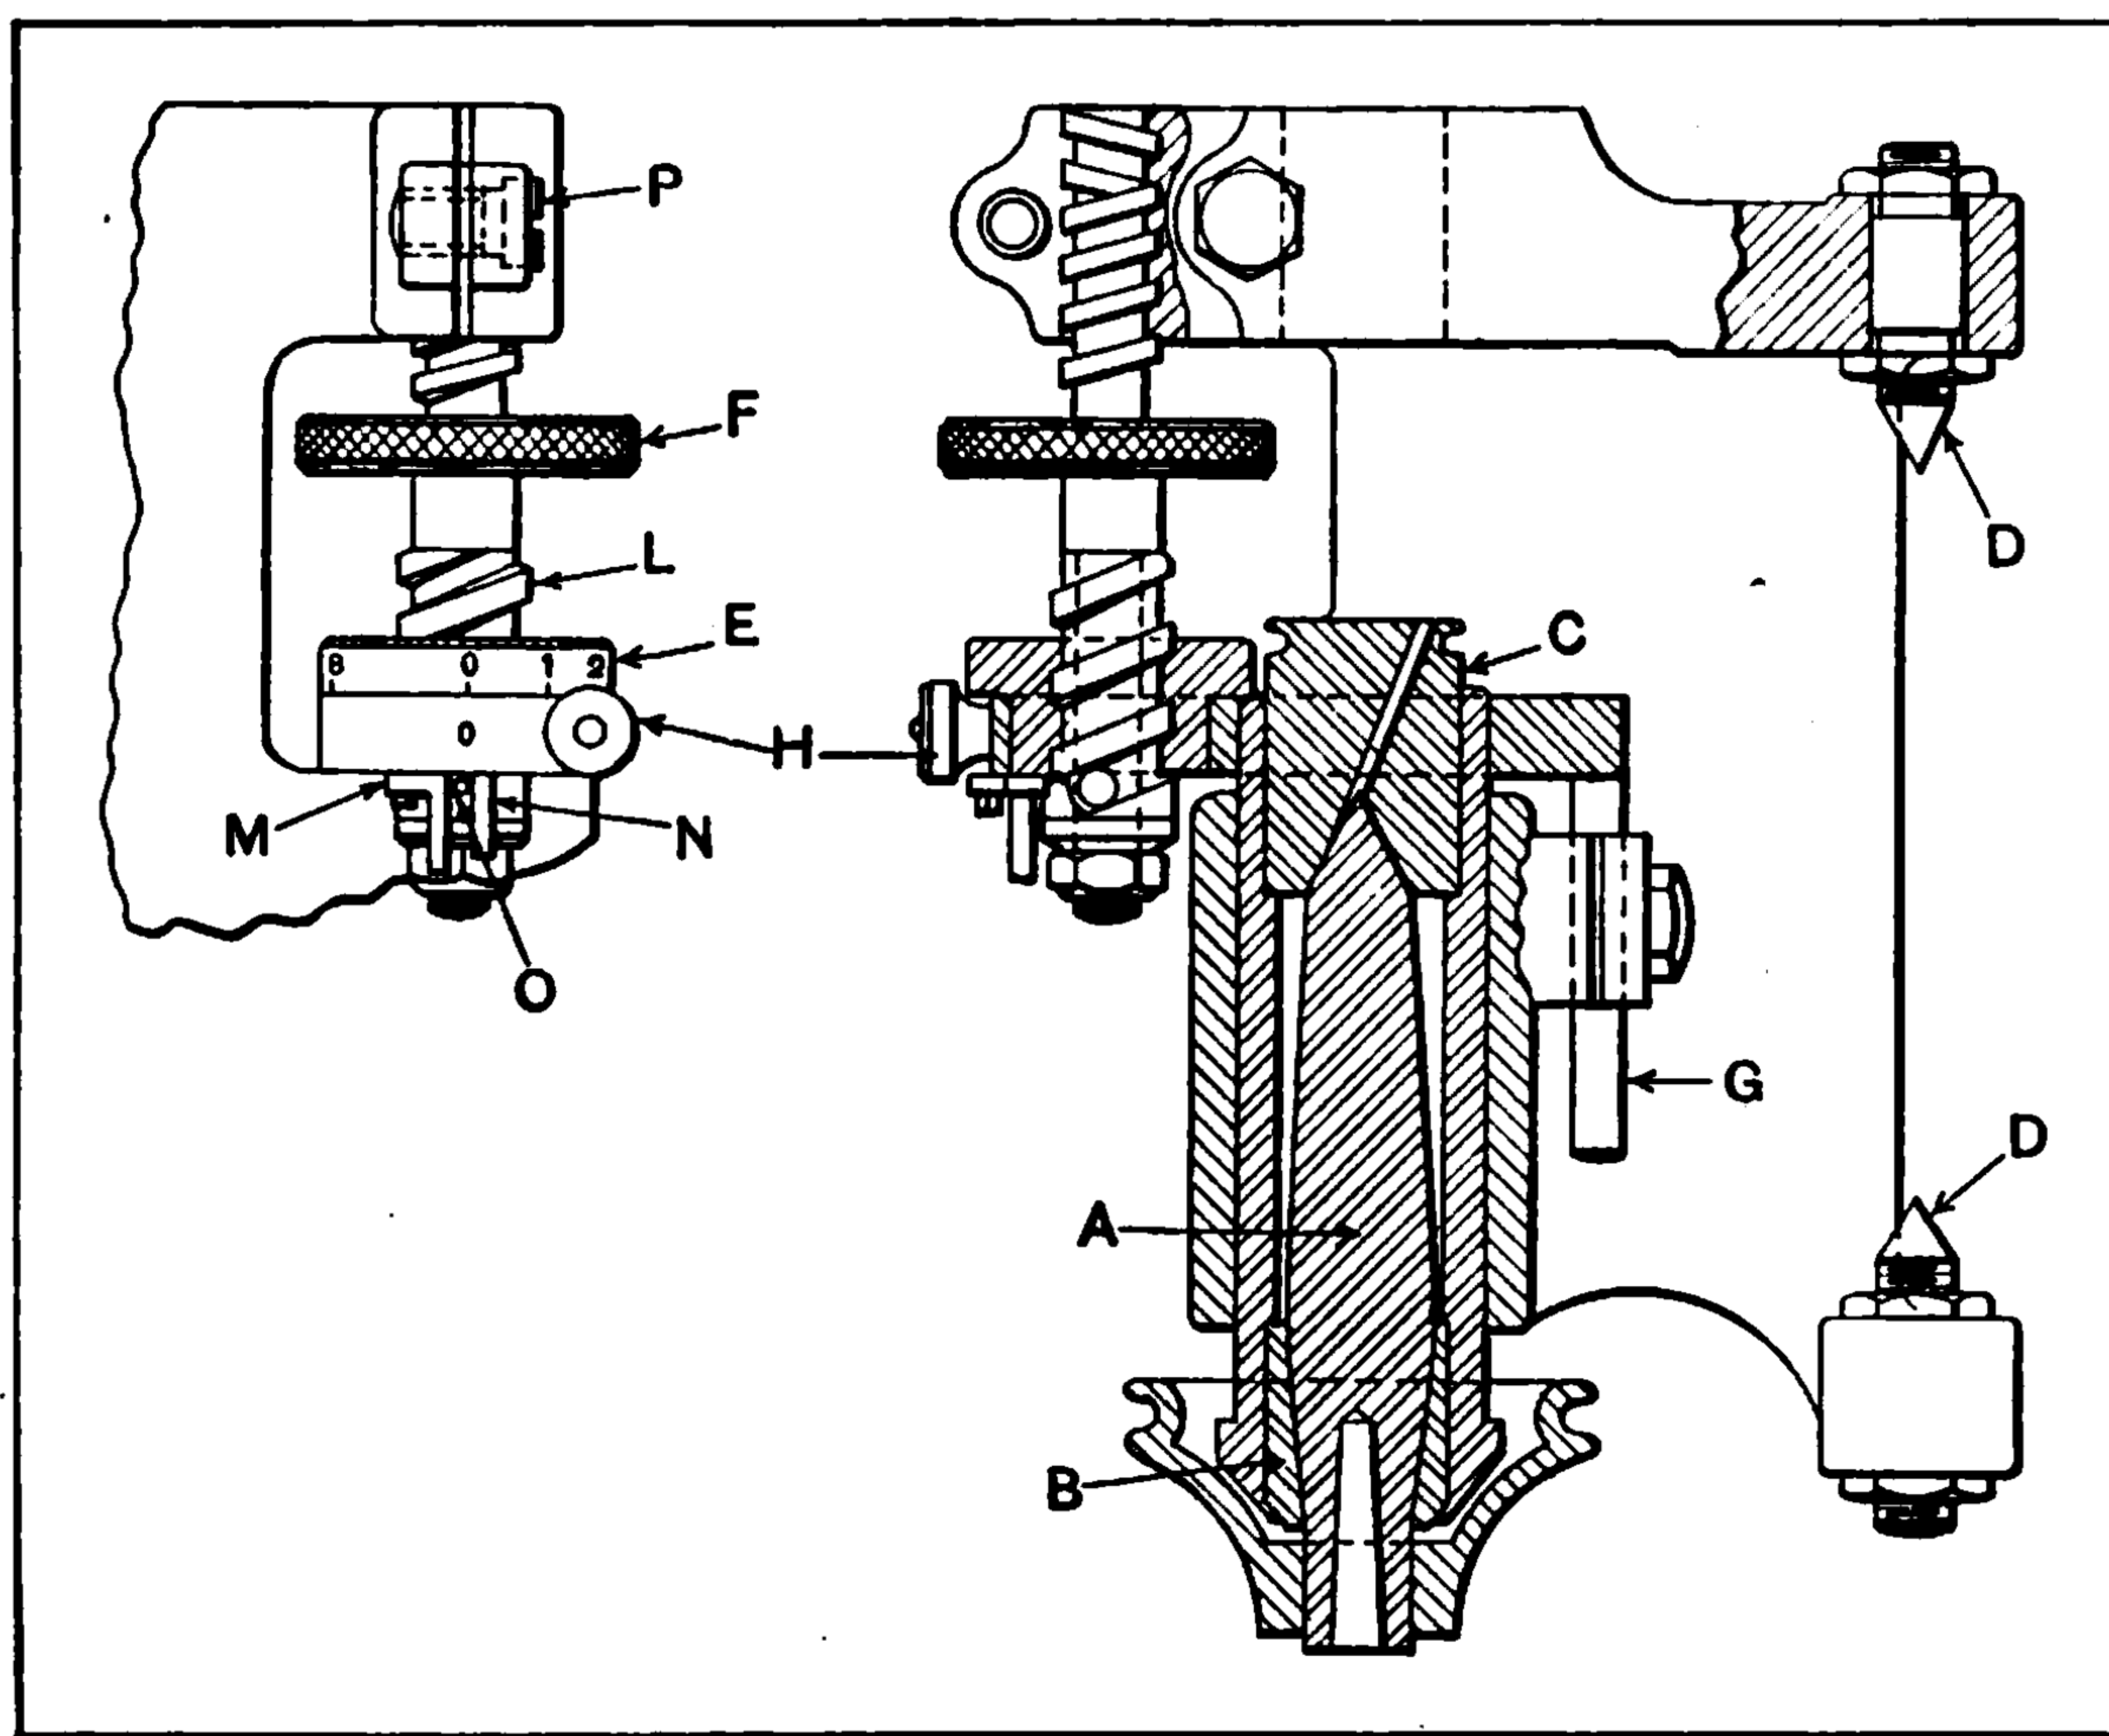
Cutter-spindle Construction of Engraving Machine shown in Fig. 3
